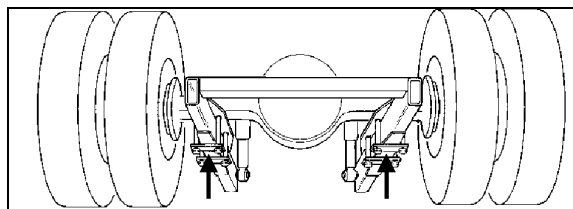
JACKING POINTS ON DRIVE AXLE
